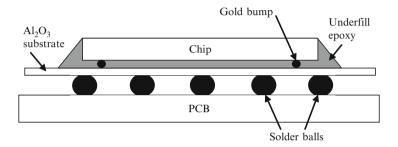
Schematic cross section of a chip-scale package (CSP) assembly
